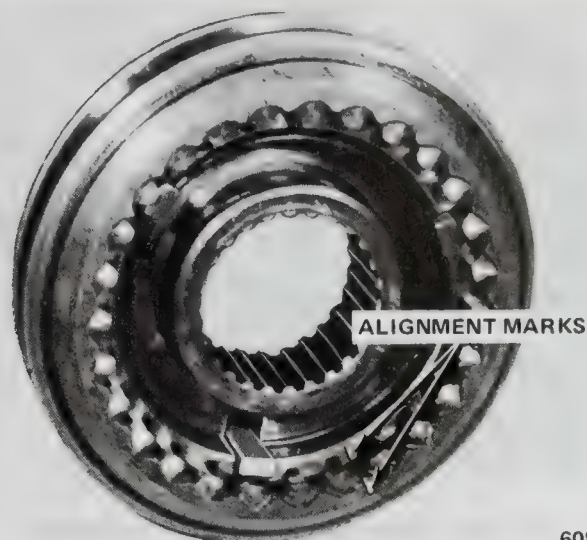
B-30 Marking Third-Fourth Synchronizer Assembly
